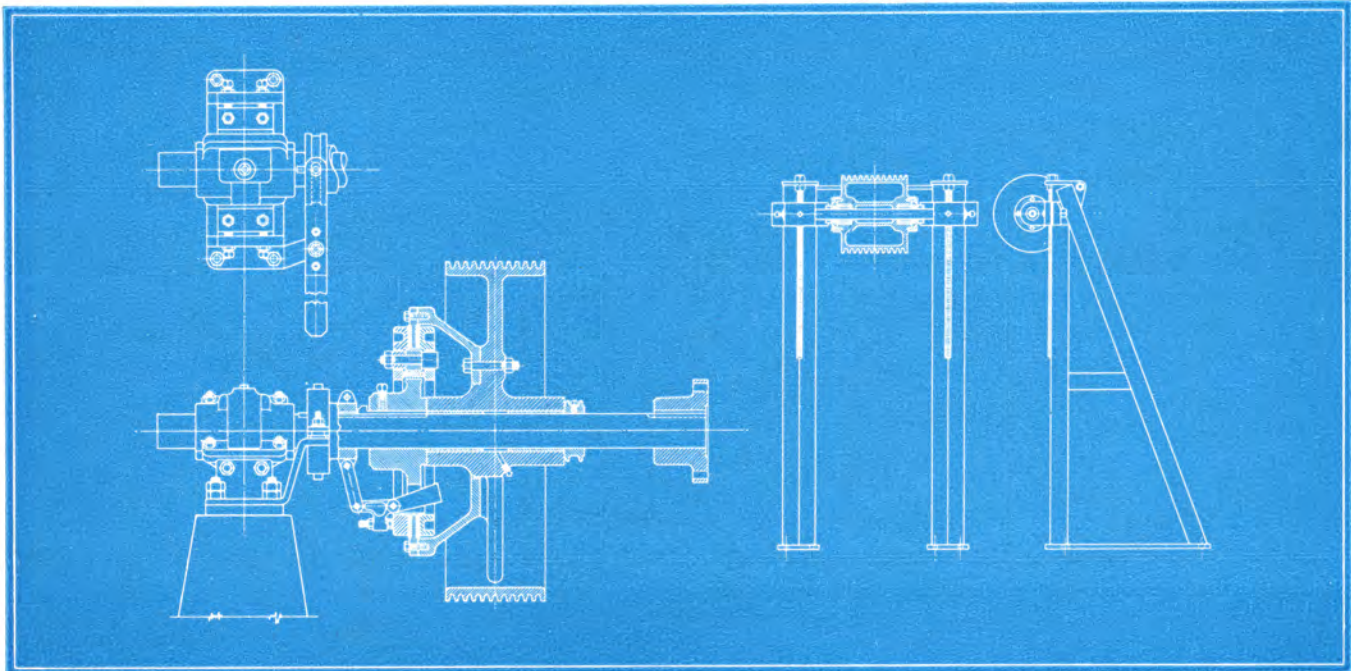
CLUTCH shaft for single cylinder gas engine drive and usual tightener for same
